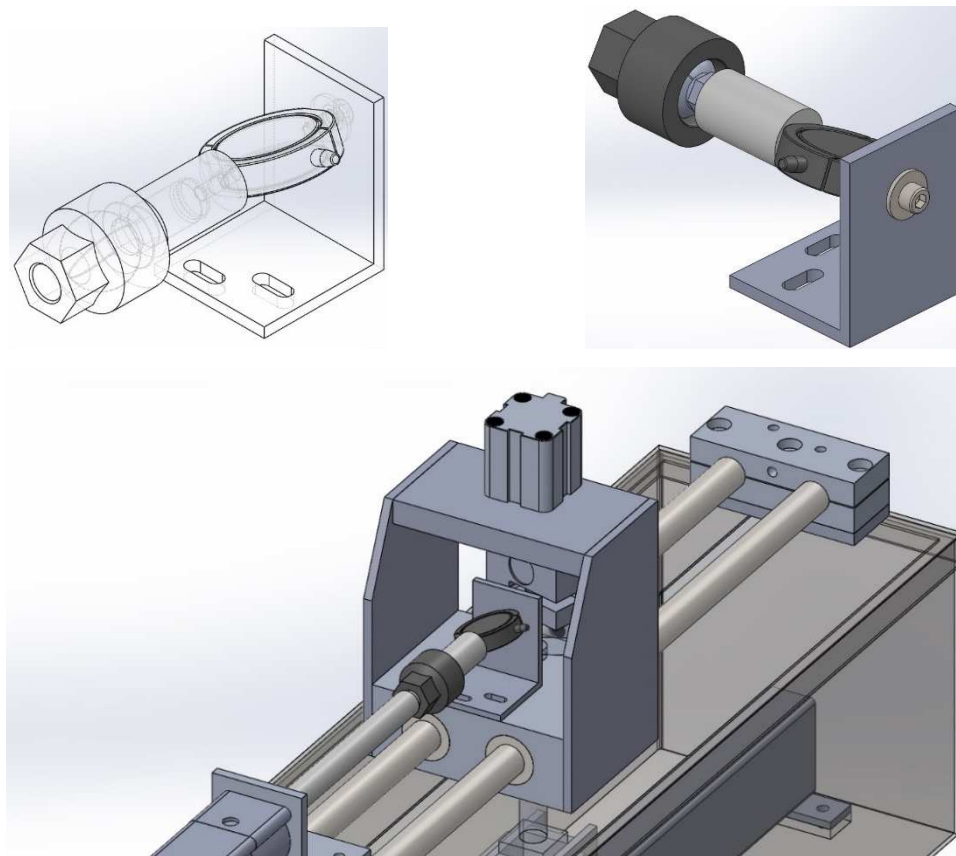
Proposed improved piston load carriage topology, including ball joint and load cell with reinforce L bracket connection
